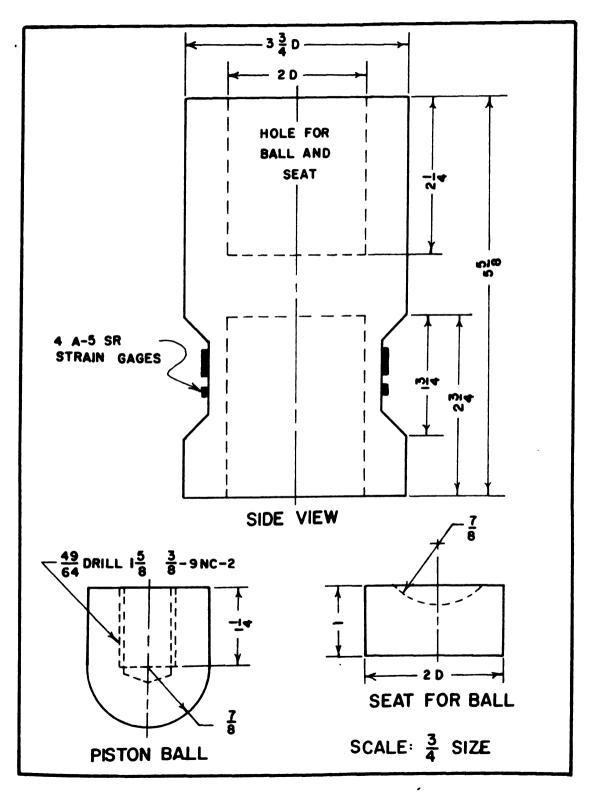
Detail drawing of Force Transducer showing location of Strain Gages and Ball and Socket joint.
